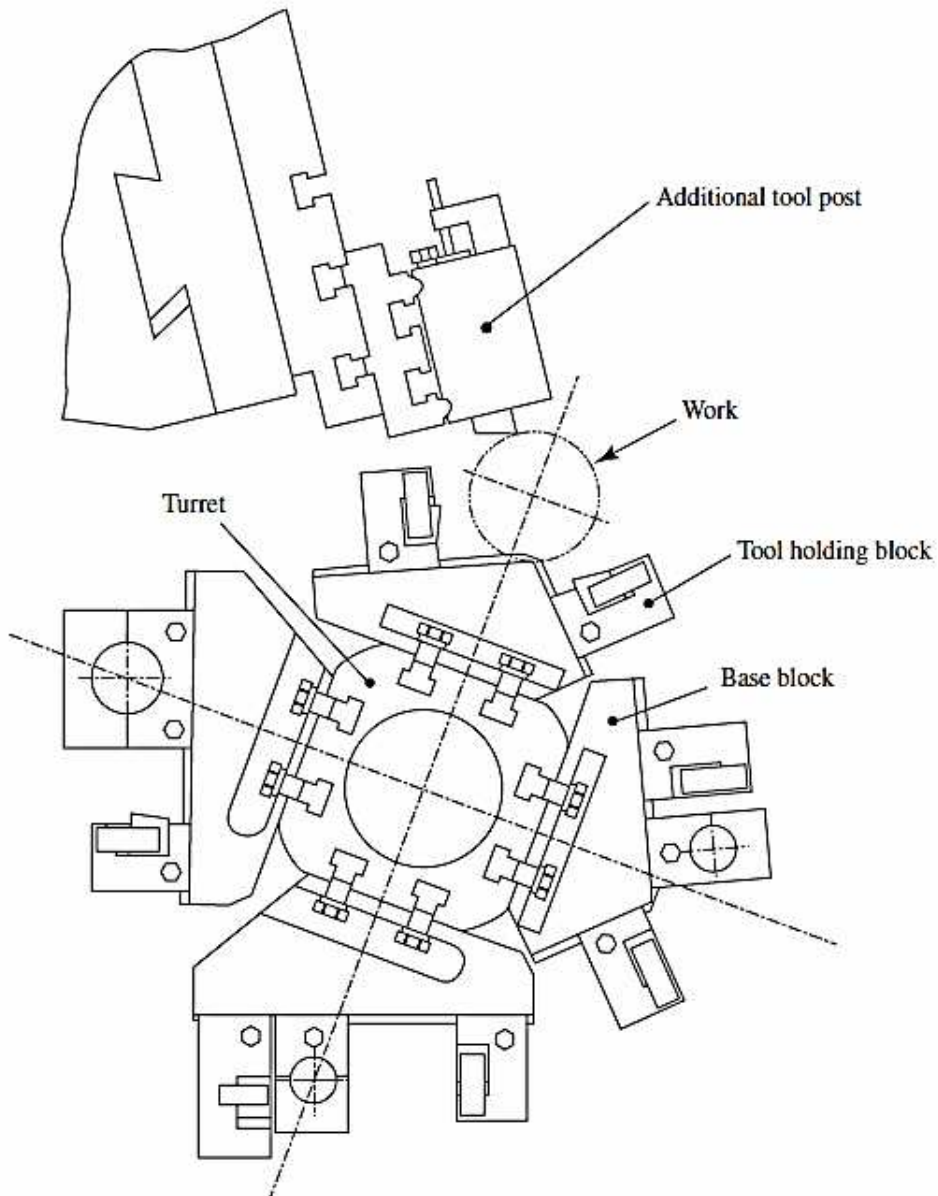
Modular principle applied to tool layout on turret by Dietz
